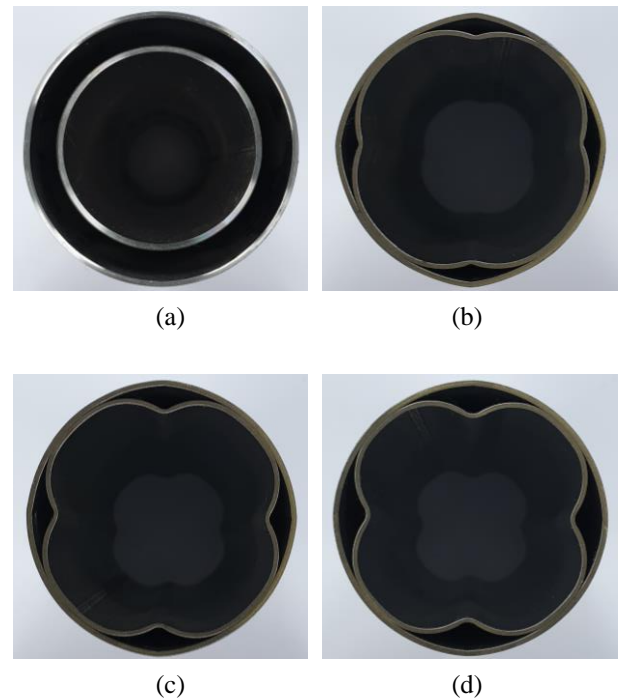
cross-sectional profiles: (a) initial double-layered tube, (b) bar diameter of 3 mm, (c) 4 mm, and (d) 5 mm
